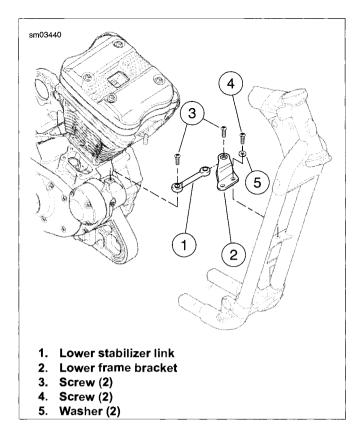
Lower Front Stabilizer Link Assembly (typical)
